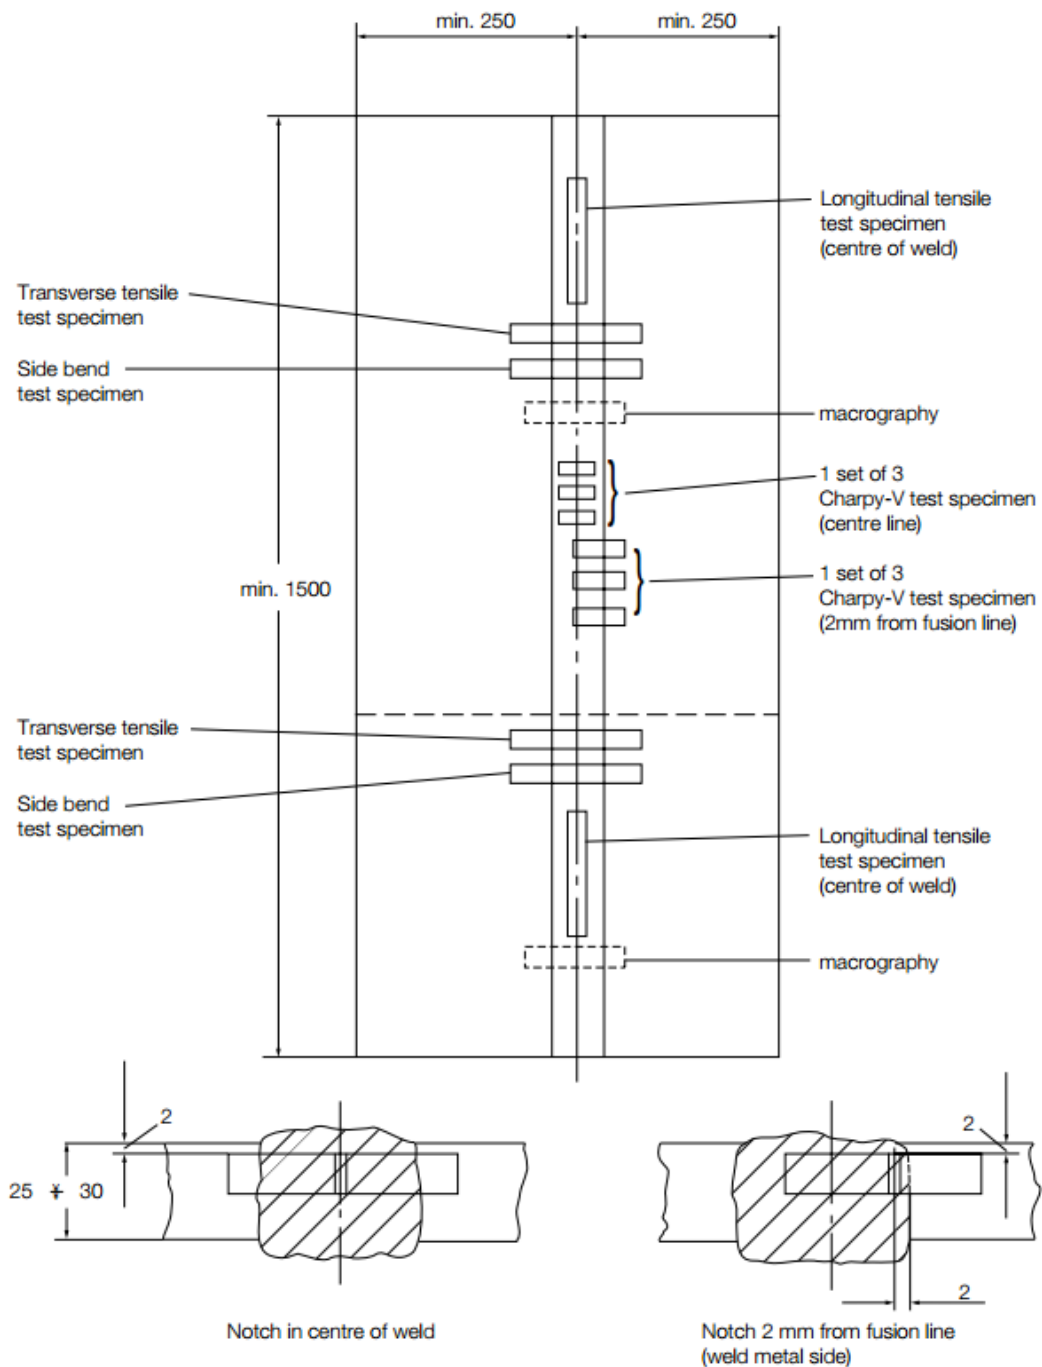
Electroslag and electrogas butt weld test assembly
